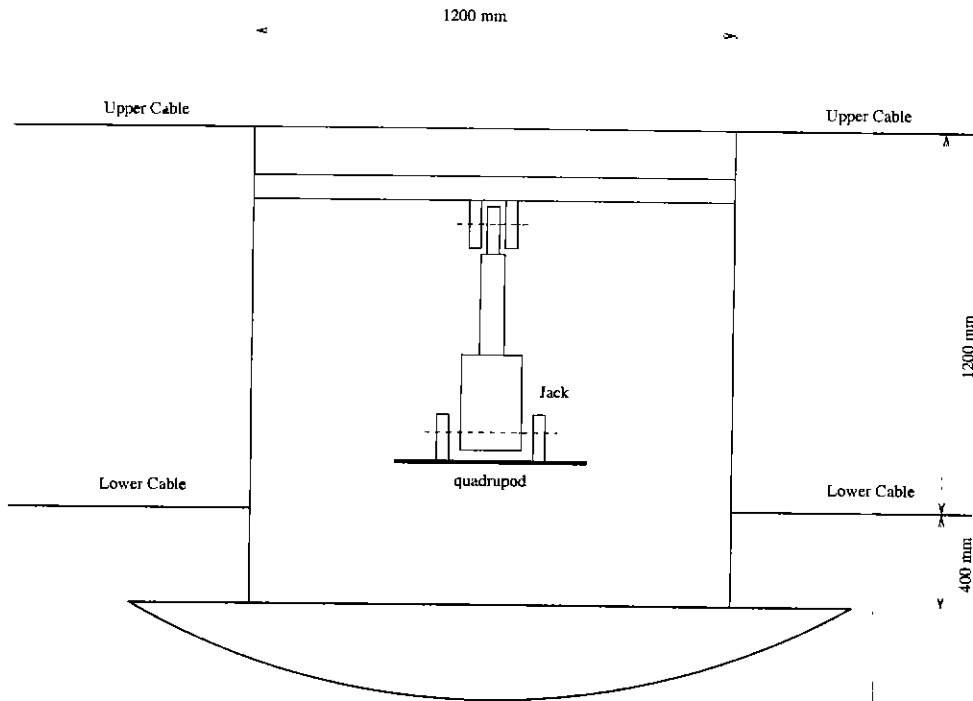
The subreflector assembly - see EDE drawing BI-6471-117-002
